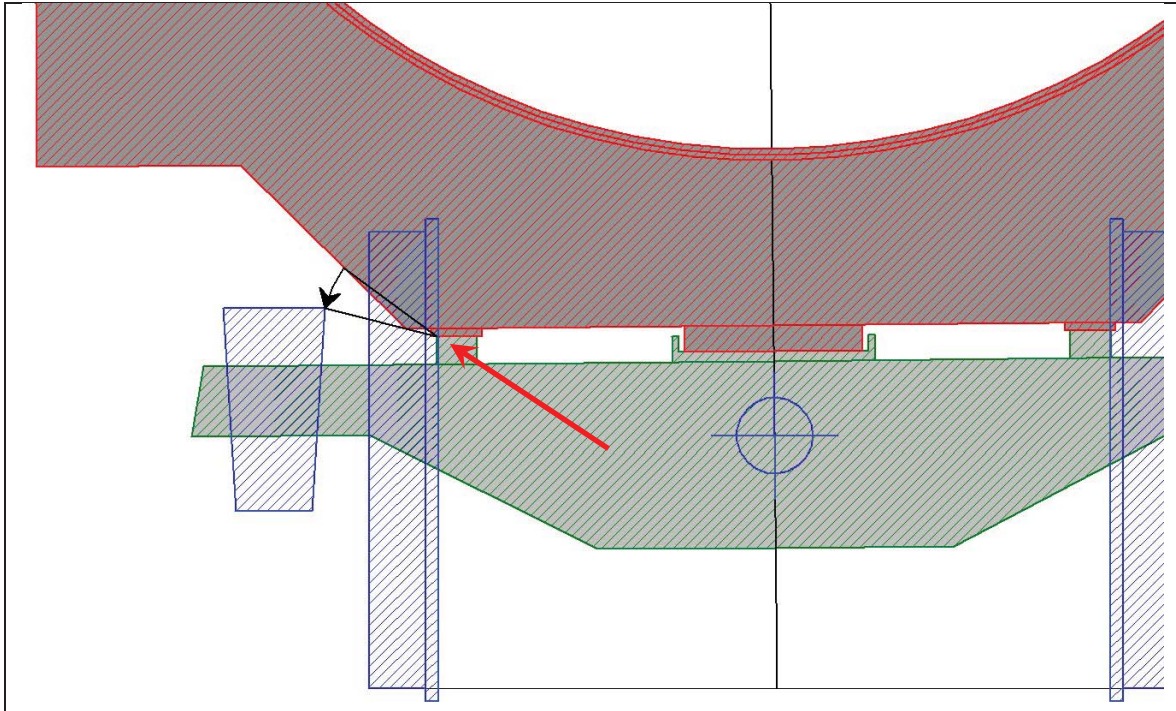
Car body rolls about the side bearings until contact occurs with the side frame.
